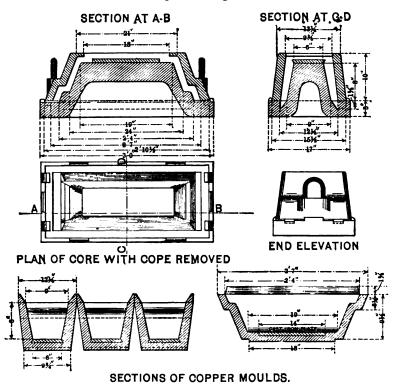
Cope and Core Apparatus for Making Copper Moulds.
